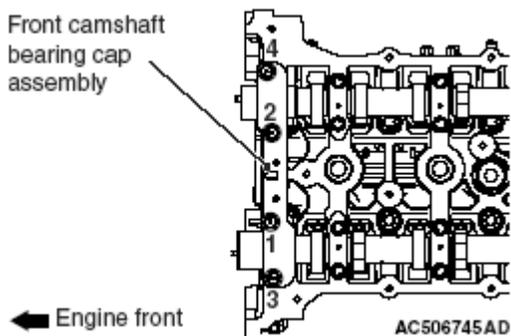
Identifying Front Camshaft Bearing Cap Assembly
